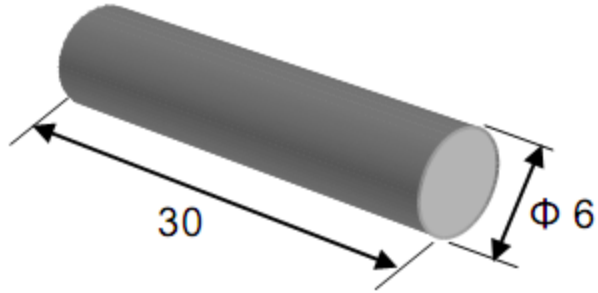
Test specimen for wear test (all dimensions are in mm)
